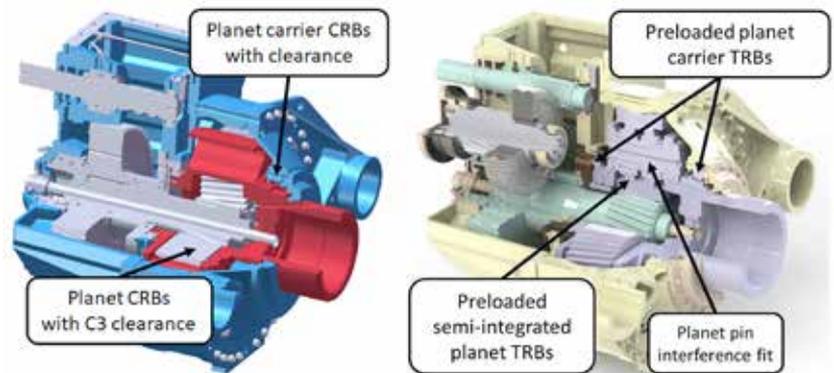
Comparison of the gearbox designs featuring cylindrical (left) and tapered (right) roller bearings. Illustration (right) by Romax Technology.
